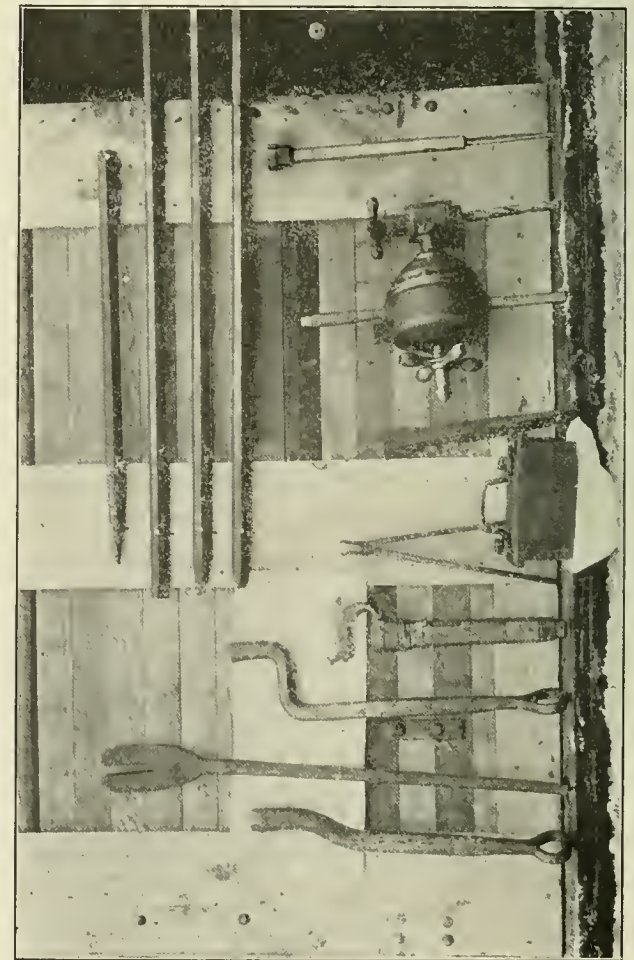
SOME OF THE TOOLS USED FOR REPAIRING STEEL CARS.
